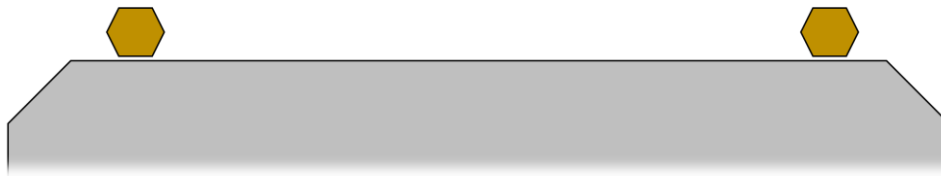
BOLT HEAD EDGES PARALLEL TO PLATE EDGE OF U-01202A TO ELIMINATE INTERFERENCE
